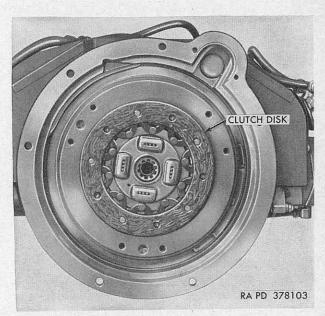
Engine with clutch pressure plate removed showing clutch disk.
